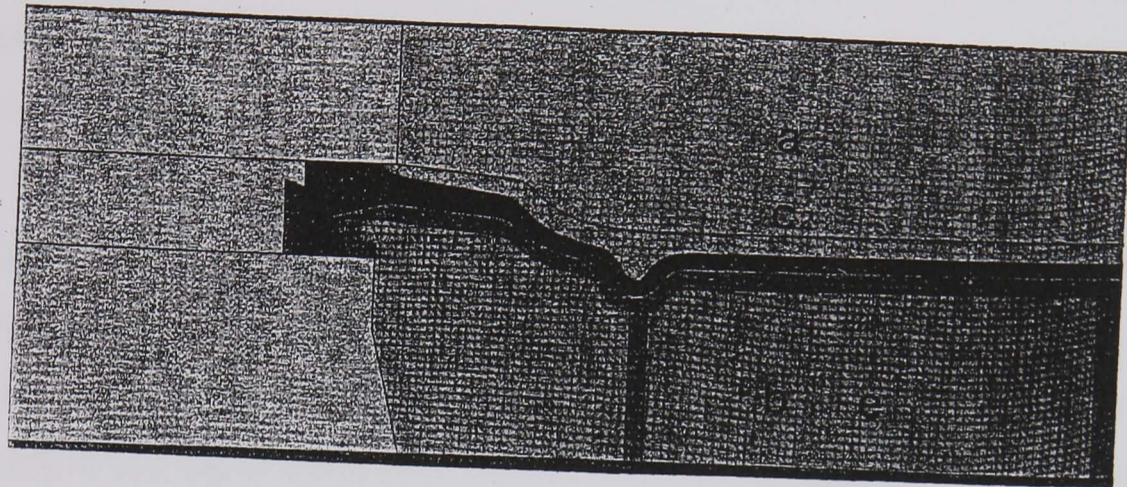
In combination pressing of a flatware piece, mechanical pressure is produced by (a) hard punch surface and a complex lower punch consisting of (b) hard material and (e) pressurised hydraulic liquid pressing up against a flexible surface membrane in contact with (C<sub>2</sub>) the flatware piece
